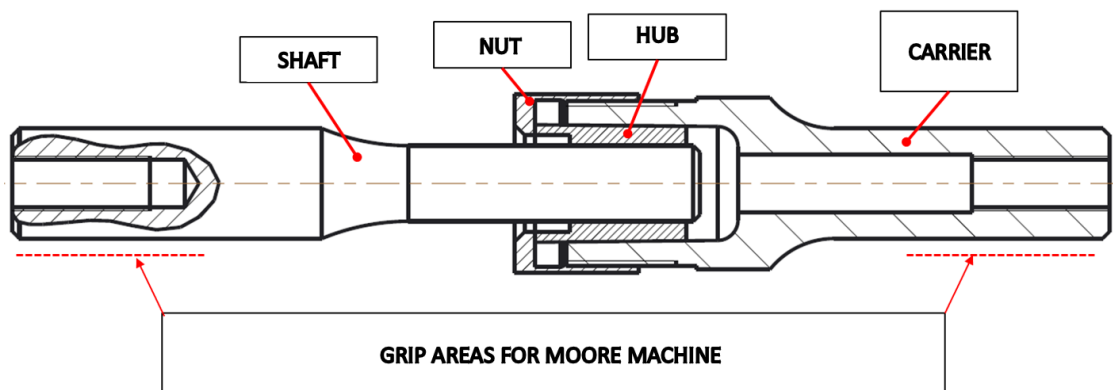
Details of the new specimen for fretting fatigue tests in interference fitted shaft-hub joints.
